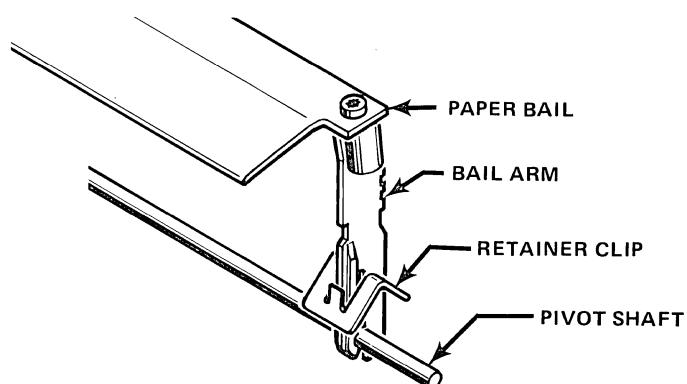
NEW STYLE BAIL-MOUNTING ARMS
